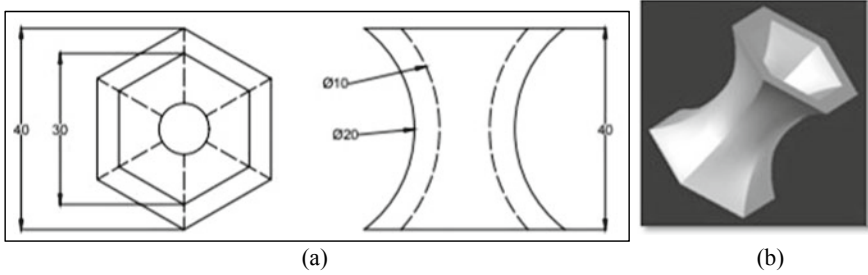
a 2D drawing of specimen with dimensions (All dimensions are in mm.); and b 3D CAD model of specimen
